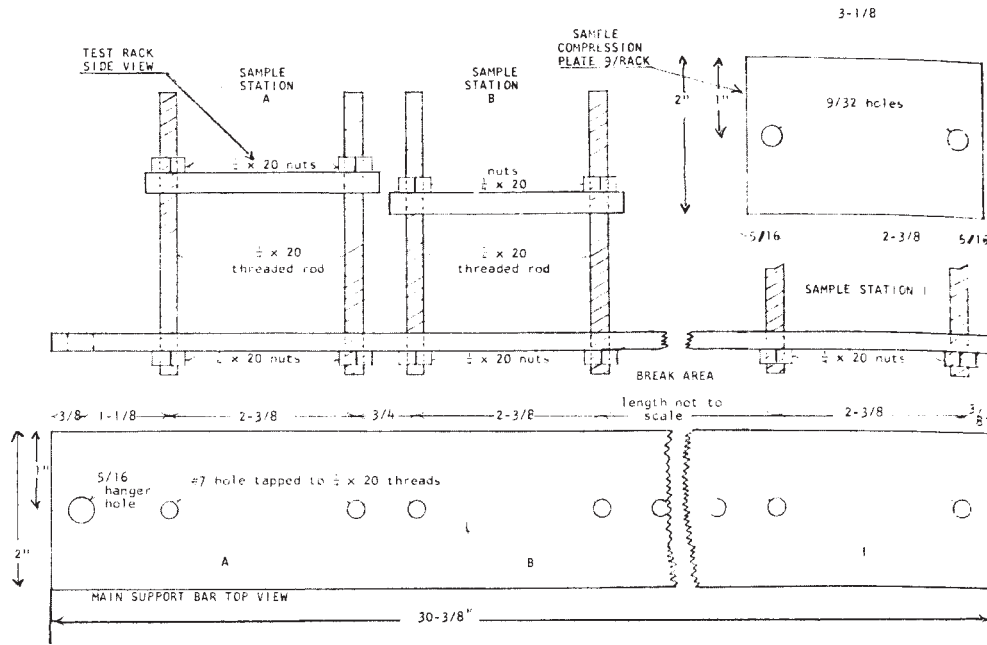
Typical ESCR Fixture for 1 1/4-in. IPS Pipe
